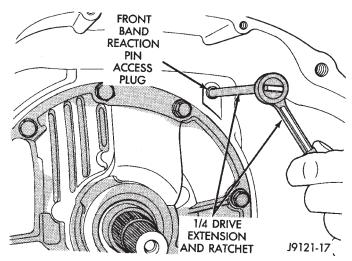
Removing/Installing Front Band Lever Pin Access Plug—46RH
